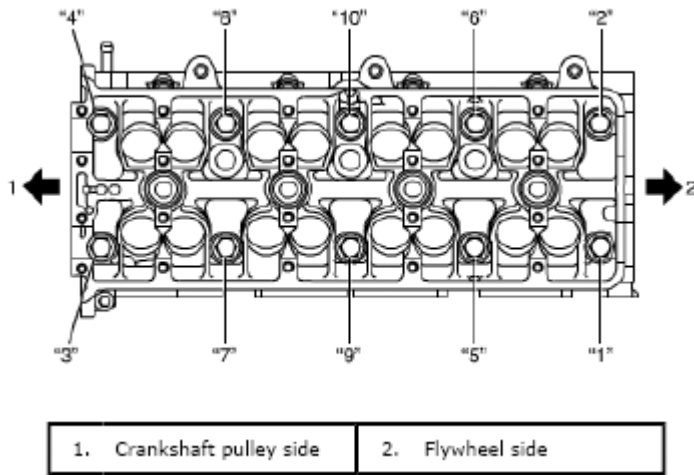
Identifying Loosening Sequence Of Cylinder Head Bolt
